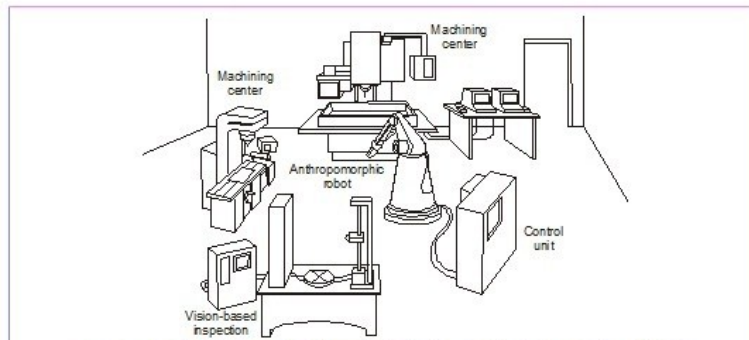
A flexible manufacturing cell, showing two machine tools, an automated part inspection system, and a central robot serving these machines
